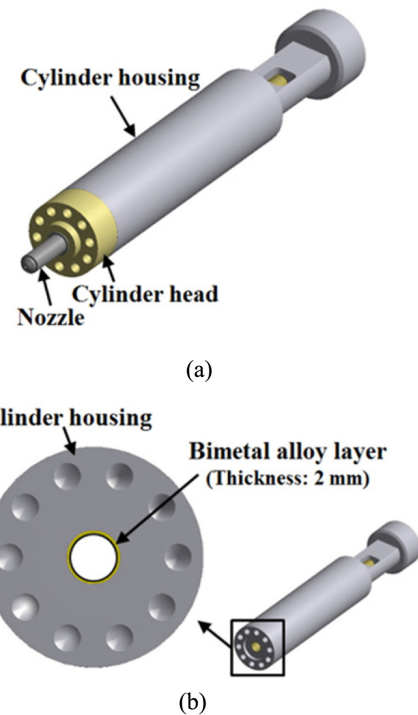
Analysis model of bimetal cylinder: (a) assembly of bimetal cylinder; (b) internal structure.
